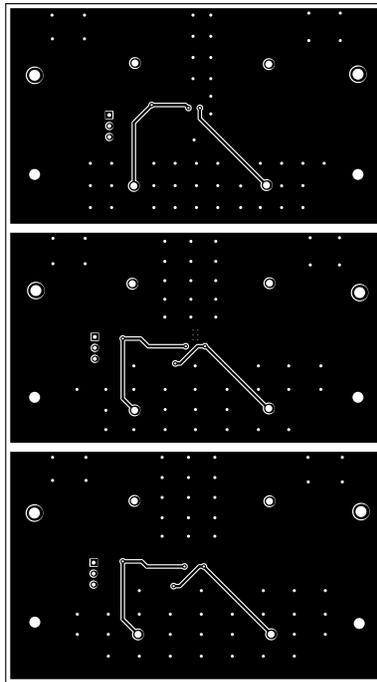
TPS2001EEVM-247 Bottom-Side Layout
